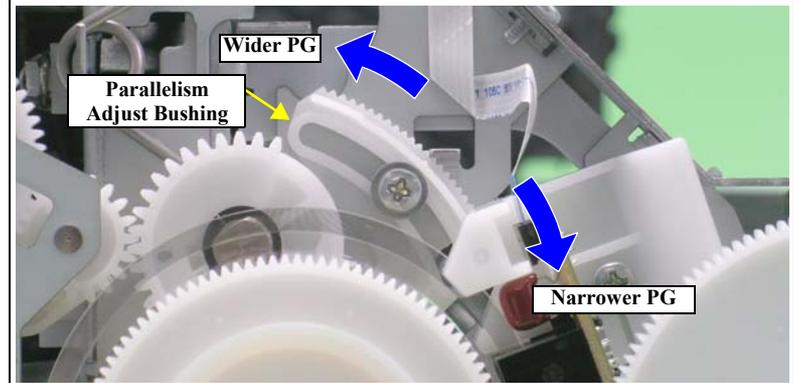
Relationship between Parallelism Adjust Bushing and PG
